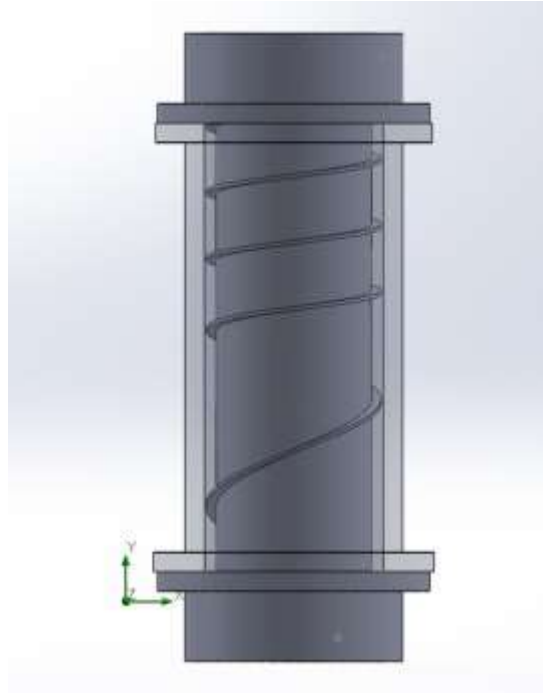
Design of underpressure helical turbine assembly of rotor diameter 0.4m
